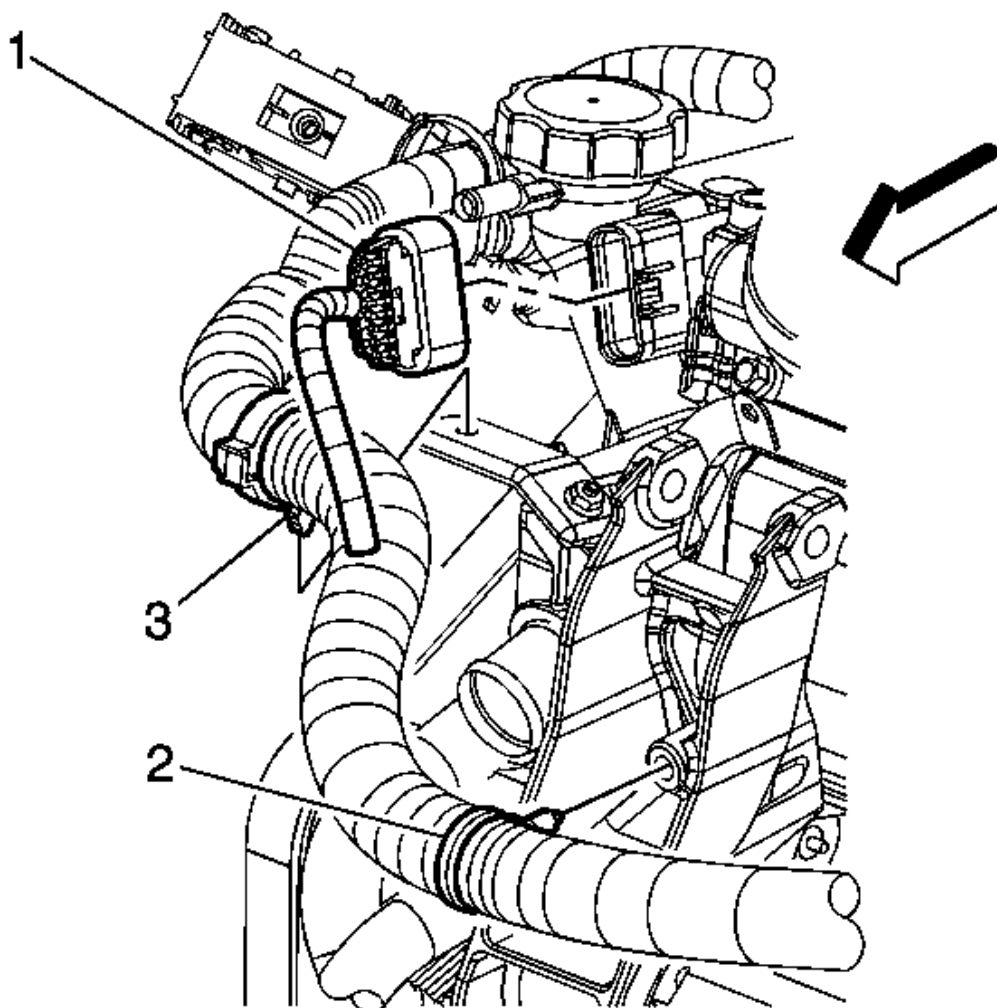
Identifying Engine Harness Clip (2) & Strut Bracket
